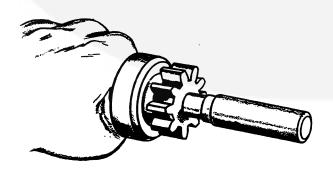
TOOL FOR DRIVING PINION STOPPER
